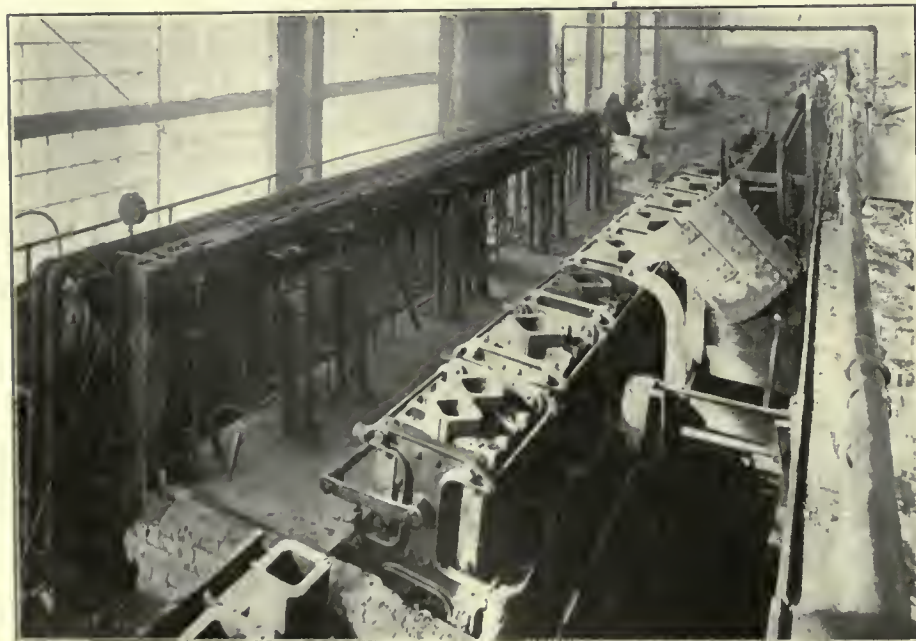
PLATFORM FOR OPERATING MACHINES FOR COMPRESSING STEEL INGOTS IN THE PLANT OF THE SIMONDS MFG. CO., LOCKPORT, N.Y. THE RUNWAY FOR THE BUGGY LADLE IS SHOWN AT THE RIGHT.
